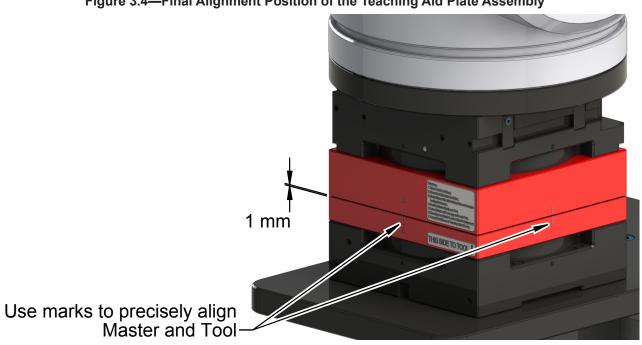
Final Alignment Position of the Teaching Aid Plate Assembly
